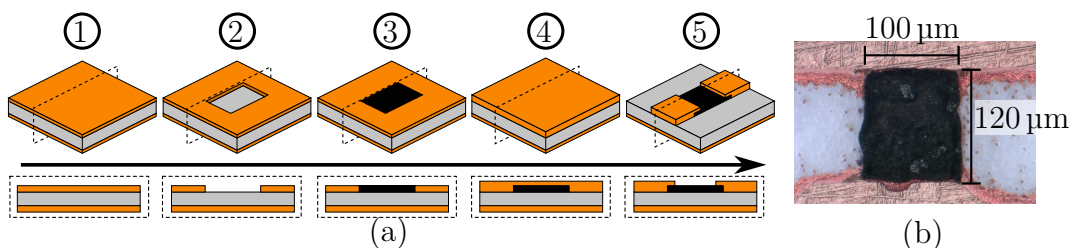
(a) Manufacturing process for integrated carbon paste resistors ①–⑤. (b) Example resistor.
